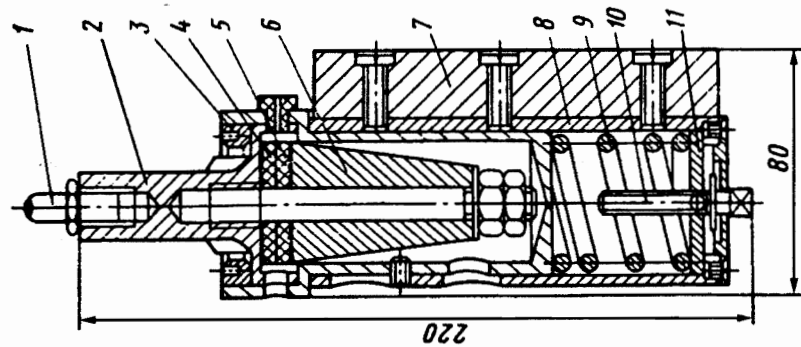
Cross-sectional view of a UZP-2 ultrasonic head for diamond smoothing [88]: (1) diamond tip, (2) radiator, (3) removable body, (4, 5) piezoceramic transducer plates, (6) sleeve, (7) fixture, (8) stationary body, (9) spring, (10) screw, (11) nut.
